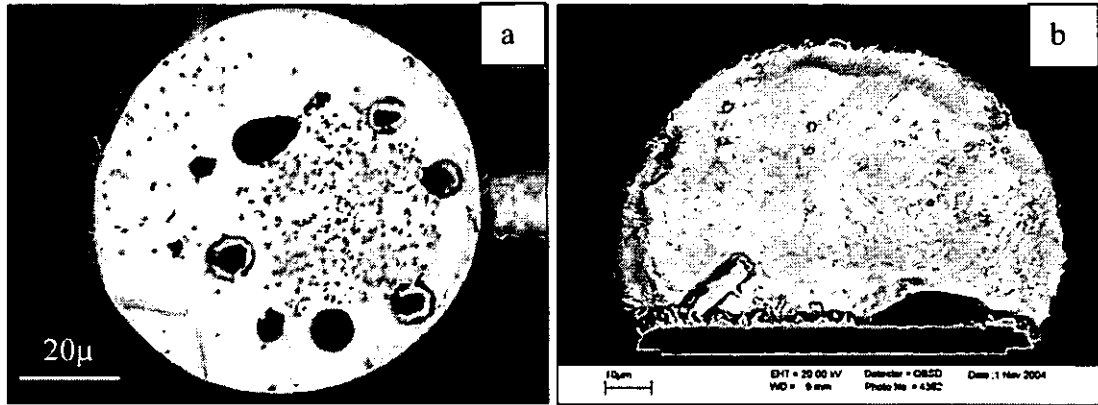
Voids formed in solder bumps near solder/EN interface.
